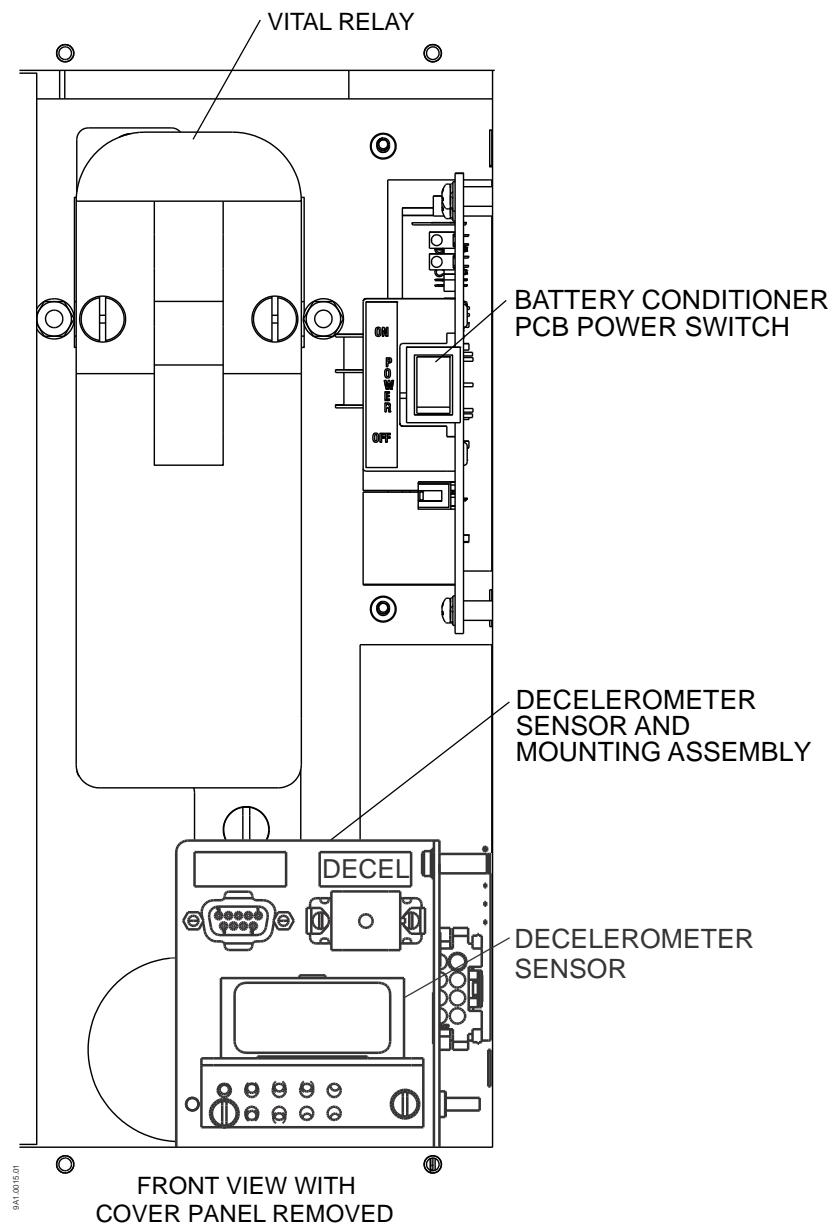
Decelerometer Sensor and Mounting Assembly
